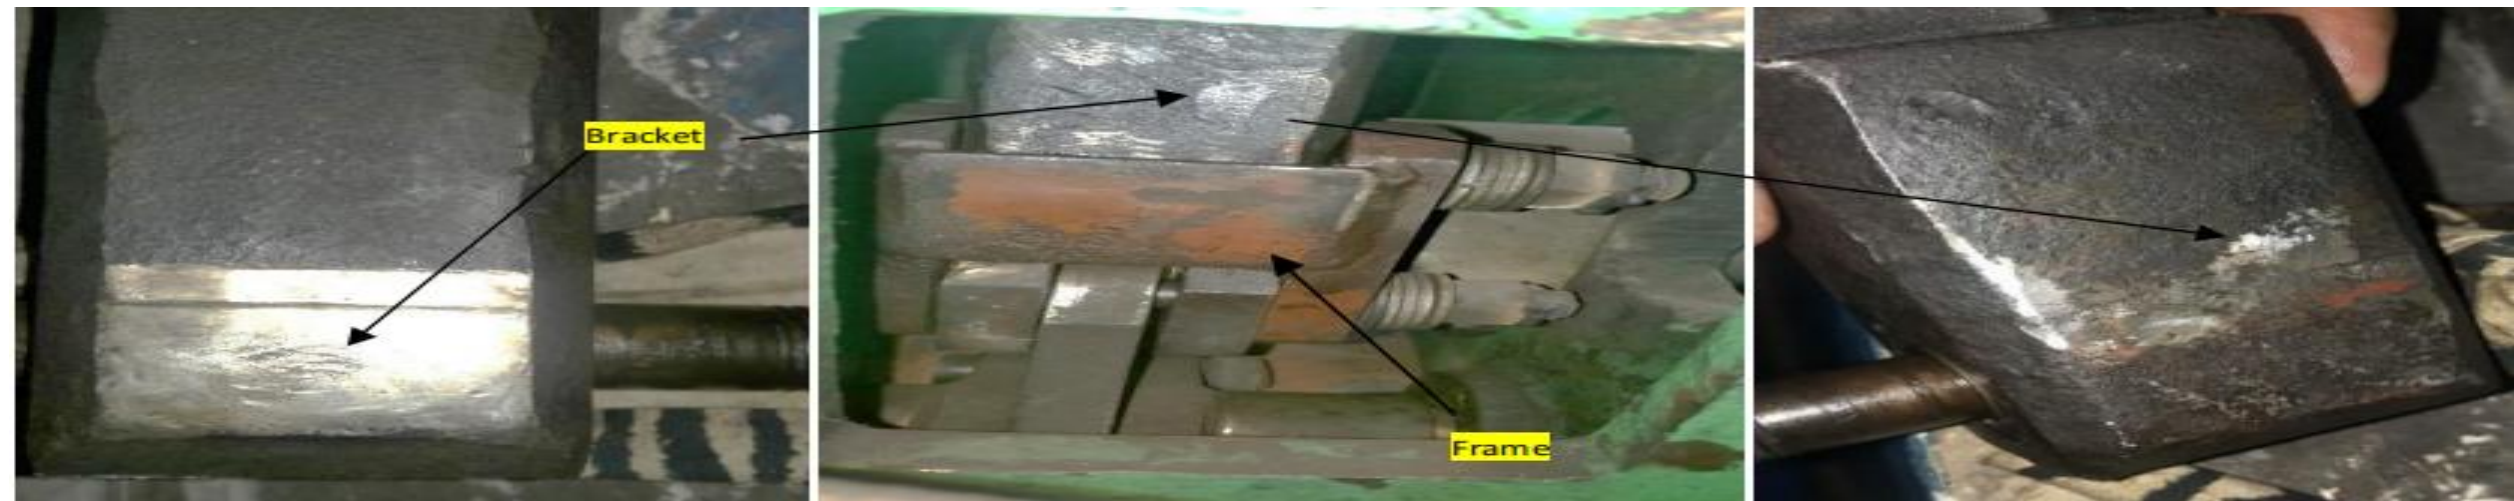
Marking on cylinder bracket indicating improper alignment of cylinder
